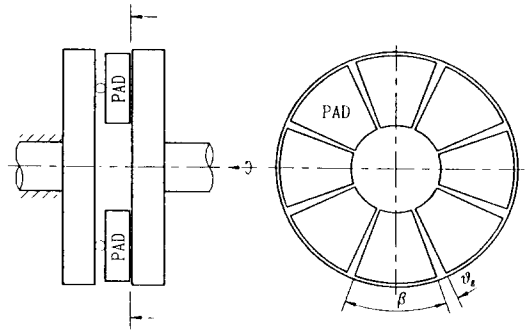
Configuration of a sector-shaped pad thrust bearing.
